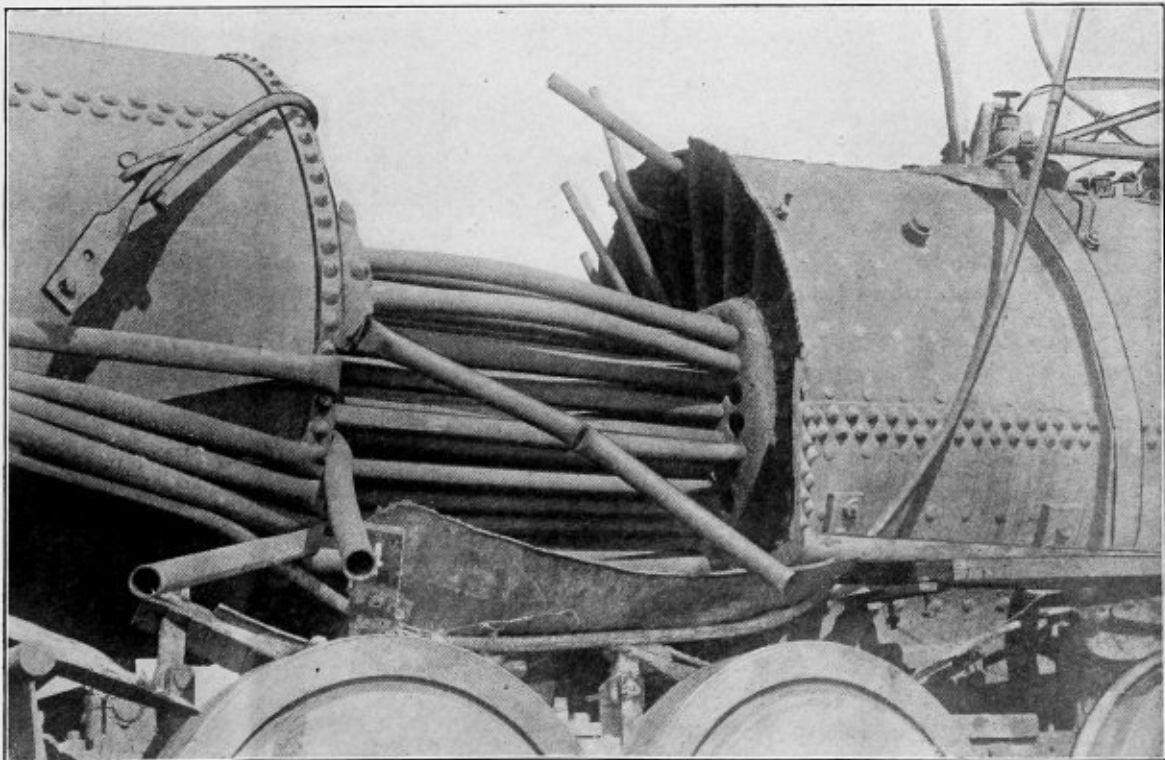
BOILER SHELL BADLY FITTED AND CRACKED
